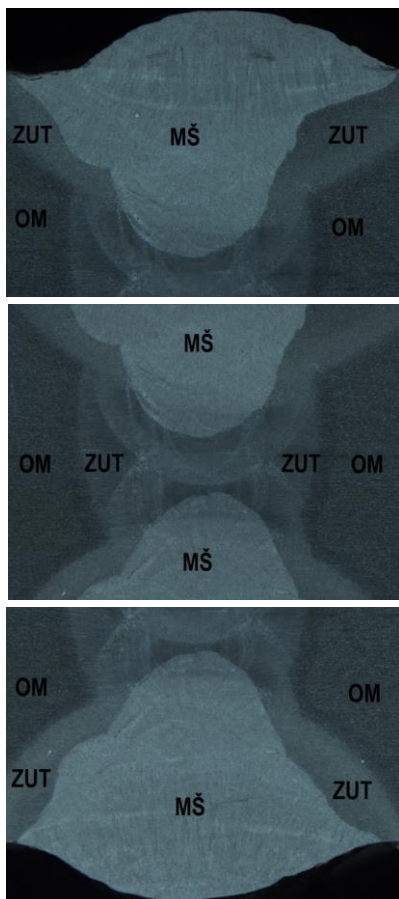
Weld face (top), central section (middle), and root (bottom).
